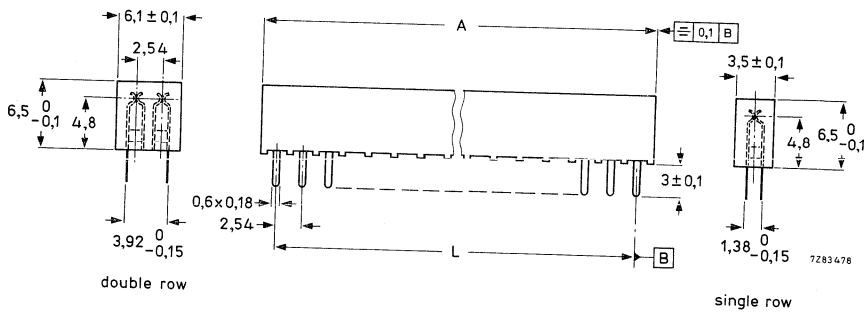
Bottom-entry socket. See Table 1 for dimensions A and L.
